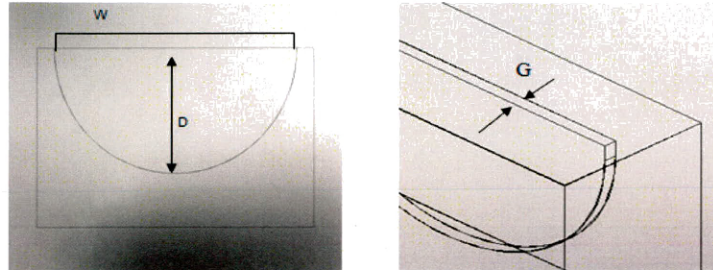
Schematic of Sample Crack Geometry (W – crack length, D – crack depth, G - crack gap)
